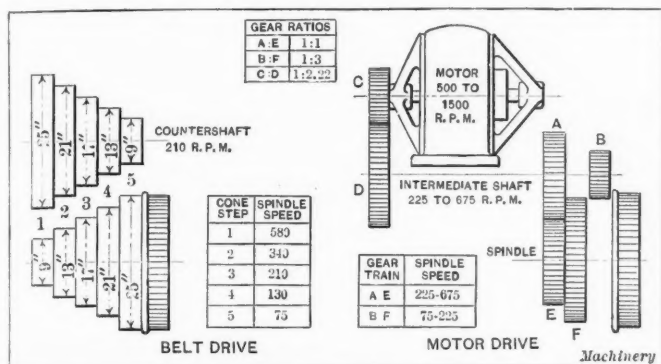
Comparison of Belt and Motor Drive of Engine Lathe
